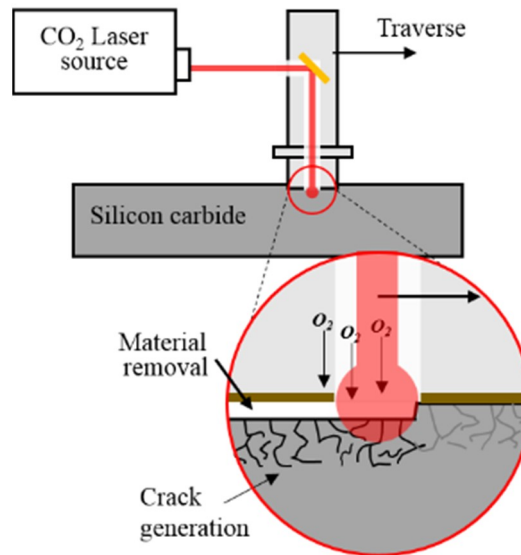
| The hybrid CO₂ laser-polishing process: Laser beam machining
